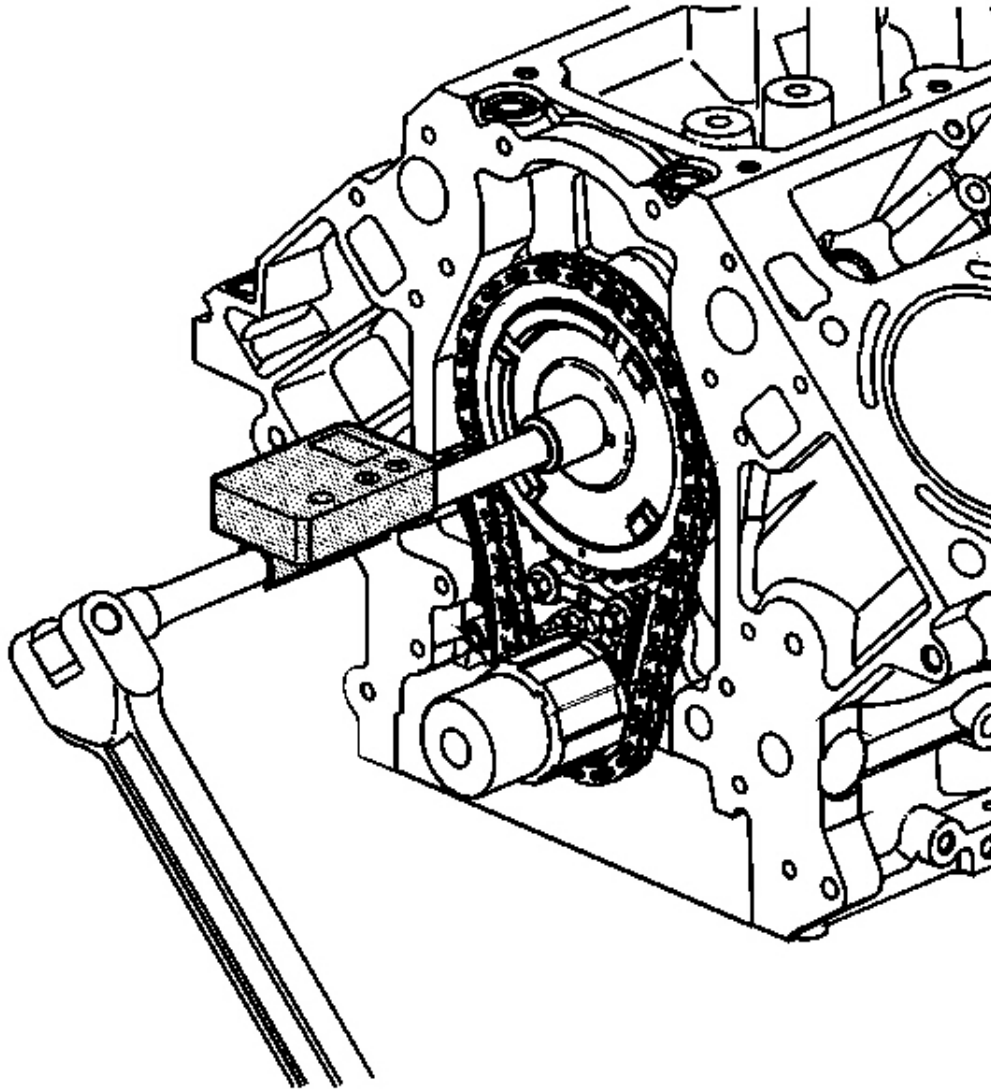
Identifying Camshaft Sprocket Bolt Tightening Sequence
